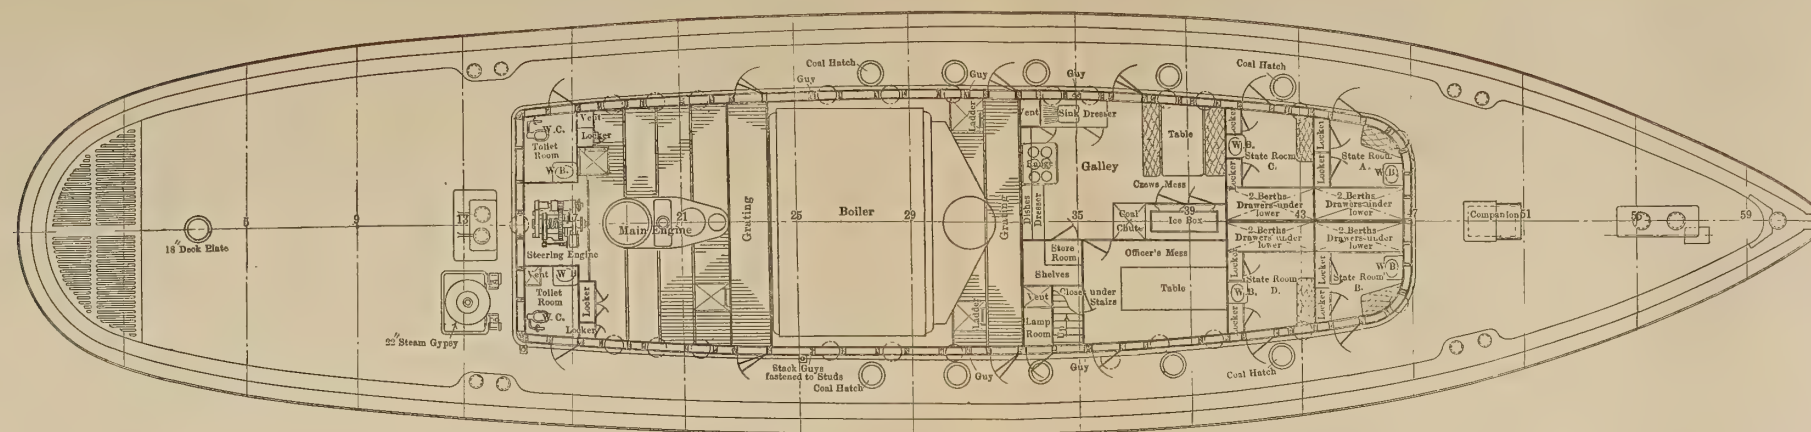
Length Overall, 129 Feet 0 Inches; Beam, Outside of Planking, 28 Feet 1 Inch; Load Draft, 12 Feet 0 Inches
